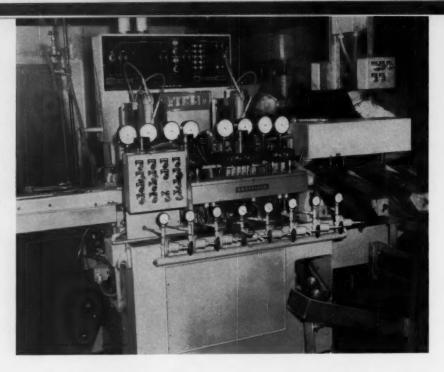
Automatic inspection unit built into the seventh station of a transfer machine for checking the diameters of pinholes in connecting-rod and cap assemblies. Eight assemblies are checked at a time.
